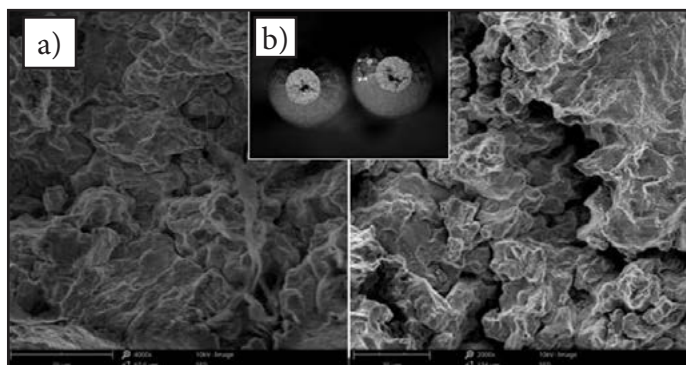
Fractographic tests of the specimen fracture in relation to the nil ductility temperature (NDT): a) mixed fracture, b) fracture in the macroscale with visible specimen area reduction
